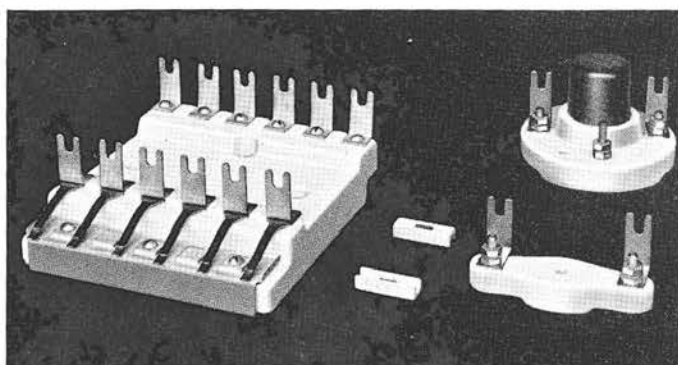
In these assemblies involving porcelain bases, note how metal parts are attached by screws through molded holes in contrast to metal inserts molded in place
